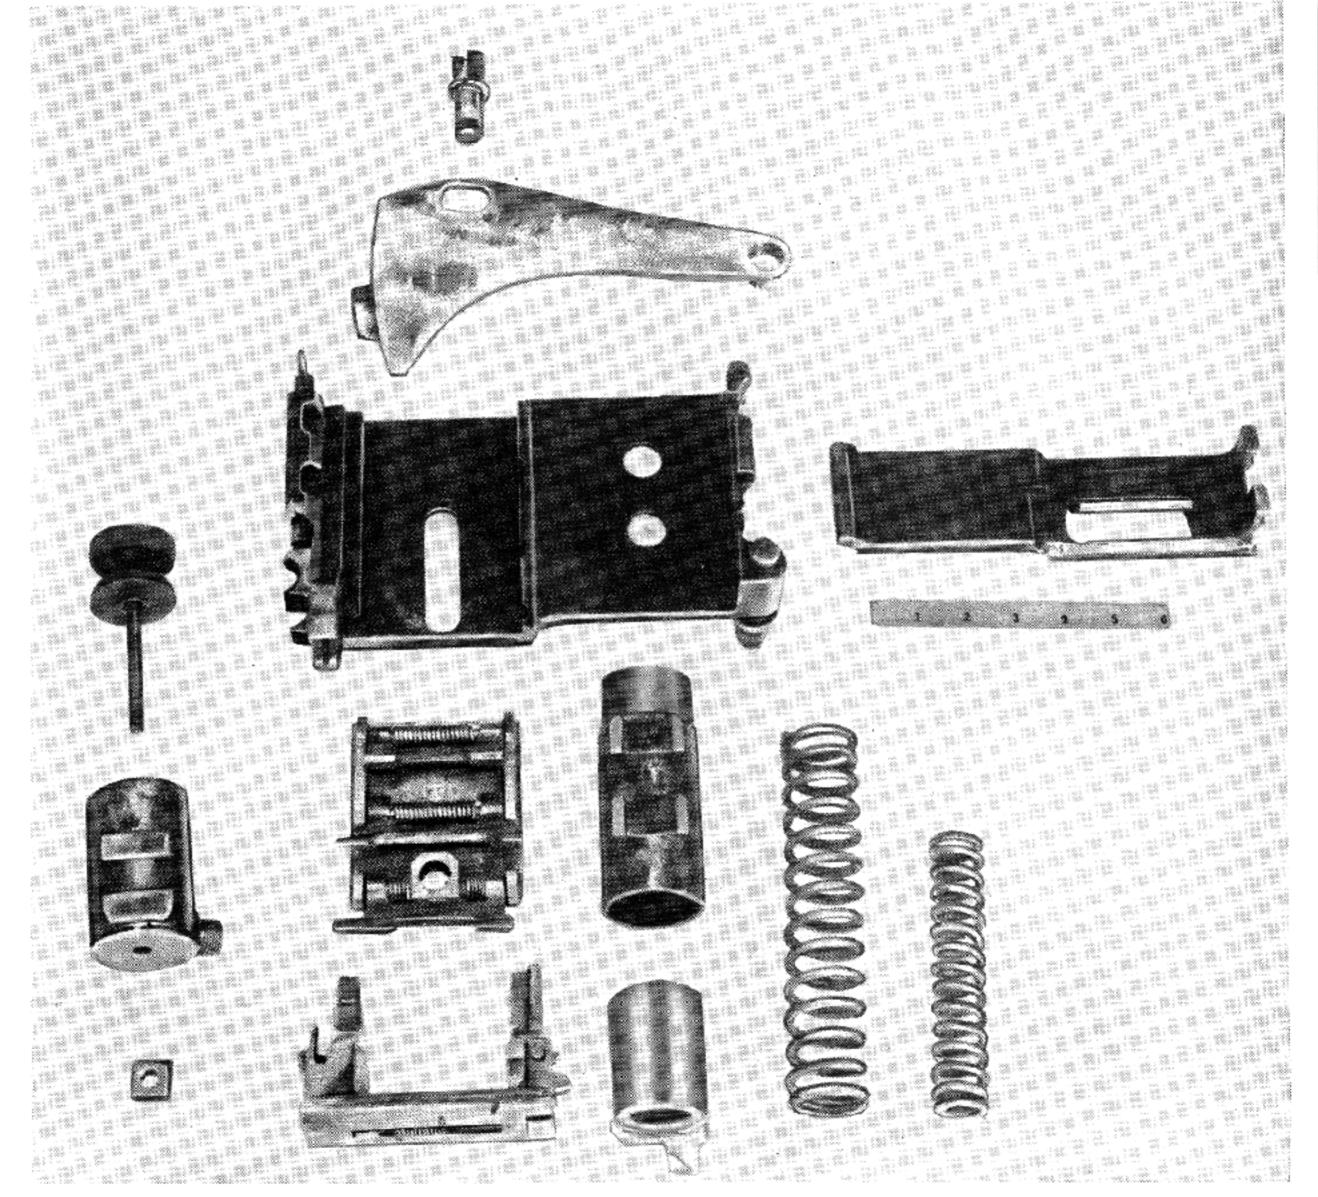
View of disassembled feeder for 23-mm NS Gun.
